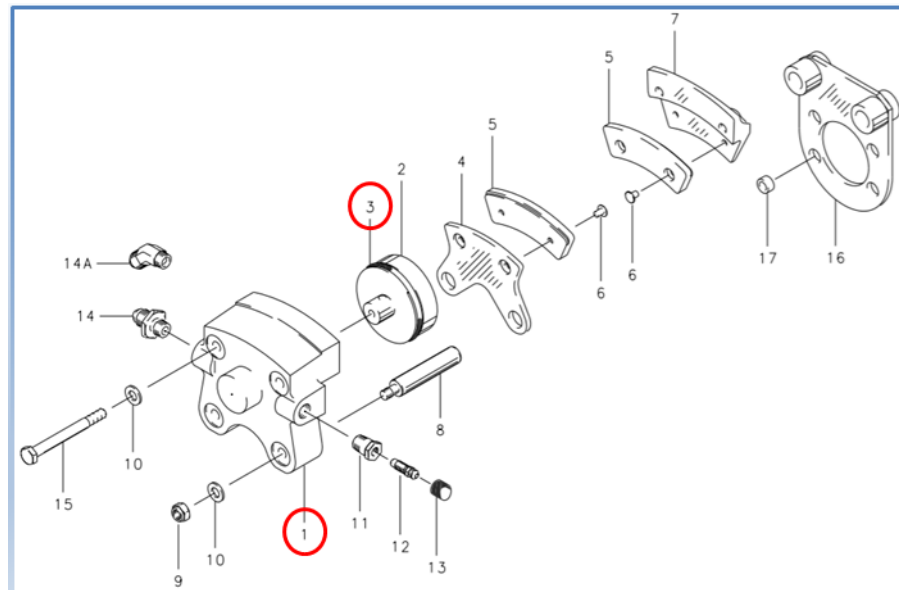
Exploded view of the brake caliper and its parts. Number 1 in the view is the brake caliper and number 3 is the O-ring installed on the piston. Image: Parker Hannifin Corporation, Illustrated Parts List, Catalog AWBPC0001-25/USA.
